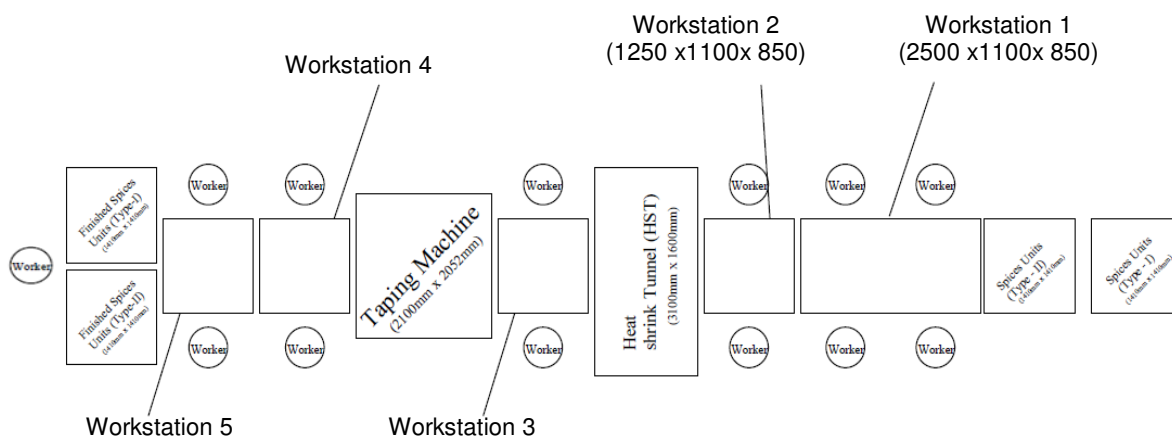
Top view of the original workstations design and layout of one packaging line; includes workers' distribution, the five workstations' dimensions and the machines. (Unit: mm).
